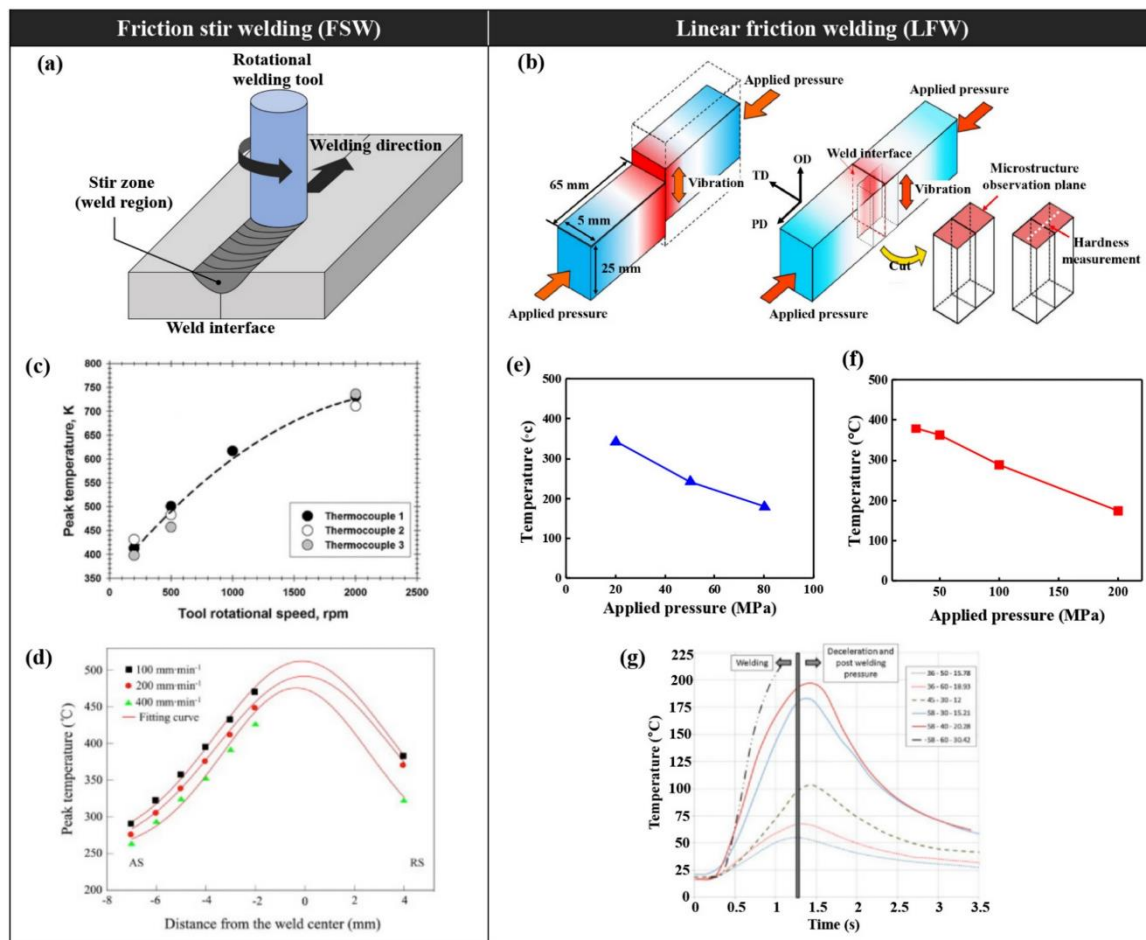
Schematic illustrations of a FSW, b LFW and the relationship between peak welding temperatures and welding parameters of FSWed c AA1050 joints [1].
